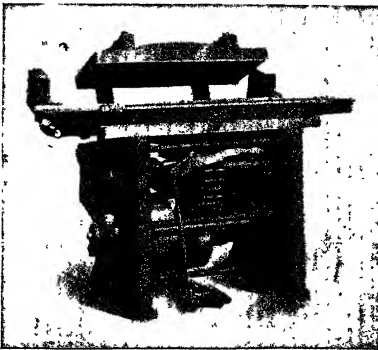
BUCKEYE POWER CAKE FORMER.
